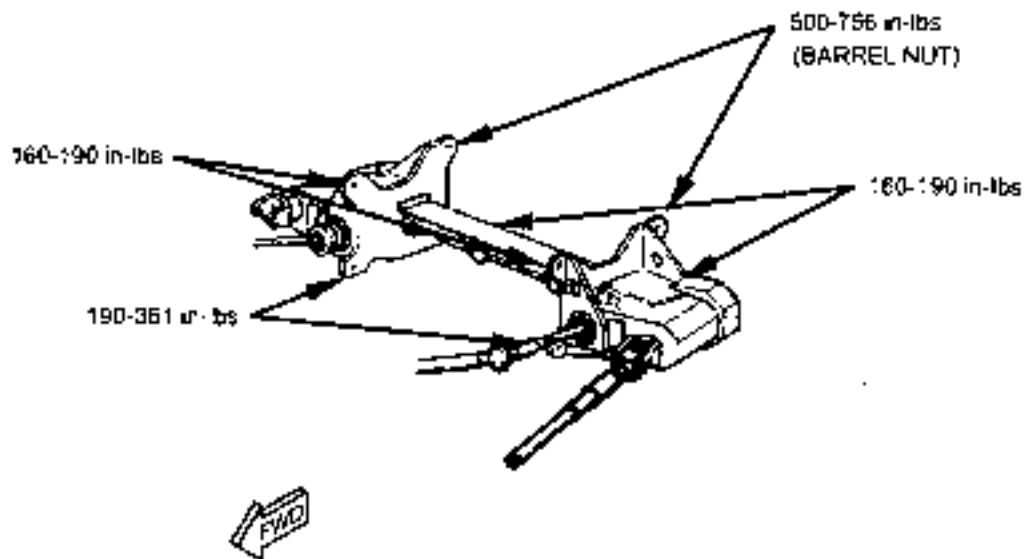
A Torque value for main landing gear gearbox attachment bolt
